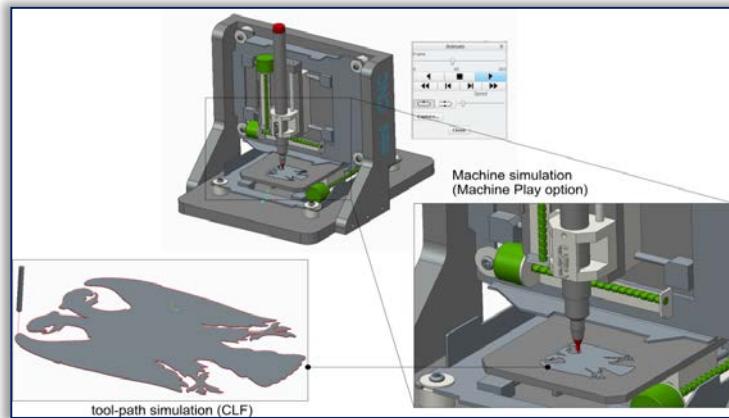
Example of the simulation within the CAD/CAM environment with active virtual machine executing the given machining program (CLF)
